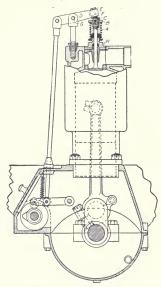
End View of Rambler Engine. A-Valve-Spring; B-Spring Adjusting Nut; C-Lock Nut; D-Rocker Arm; E-Screw for Taking Up Play in Rocker Arm; F-Cap Screw for Locking E: G-Pivot Pin for Rocker Arm; H-Hexagon Nut for Screwing Valve Cage into Position.
